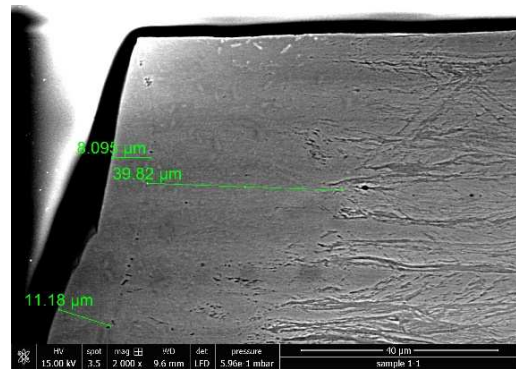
Test 1 sample 1 - 0.2 mm hole HAZ dimension
